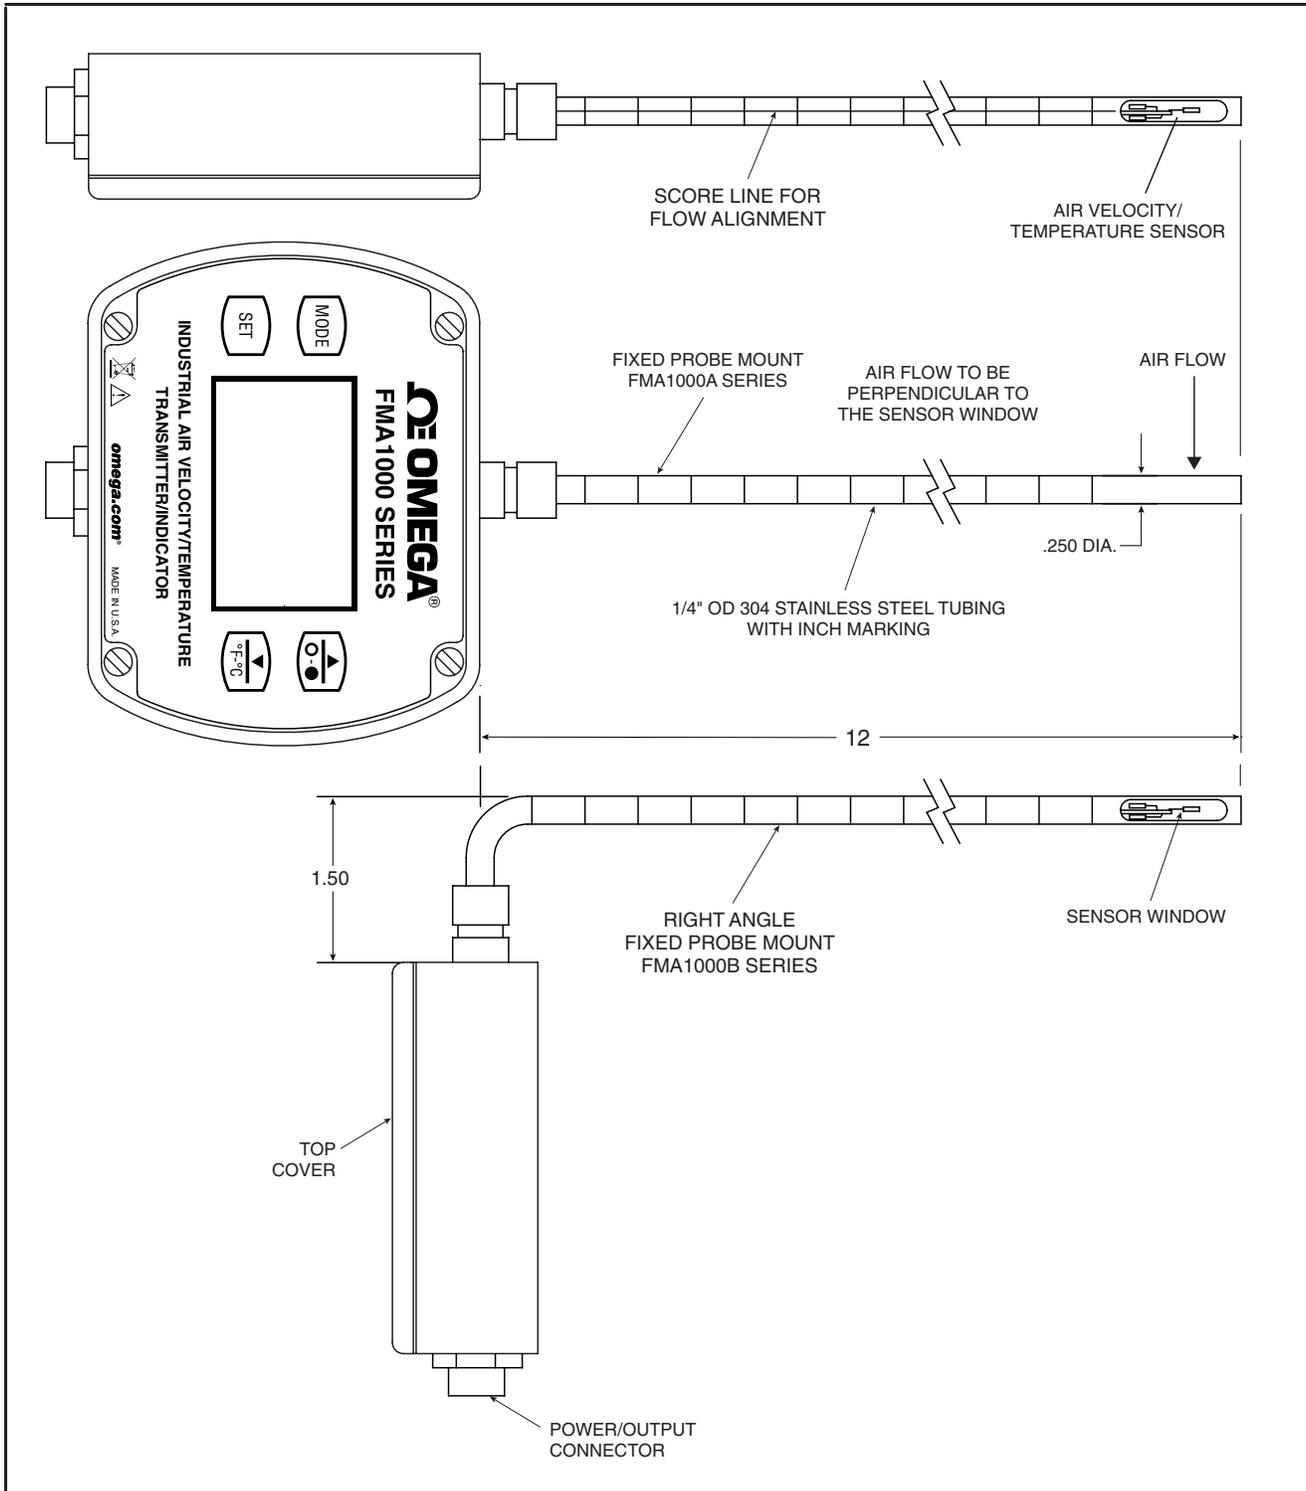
FMA1000 Transmitter with Fixed Probe Mount and Right Angle Mount
